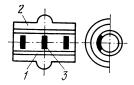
Building up babbit bosses on the upper shell to reduce bearing clearance
